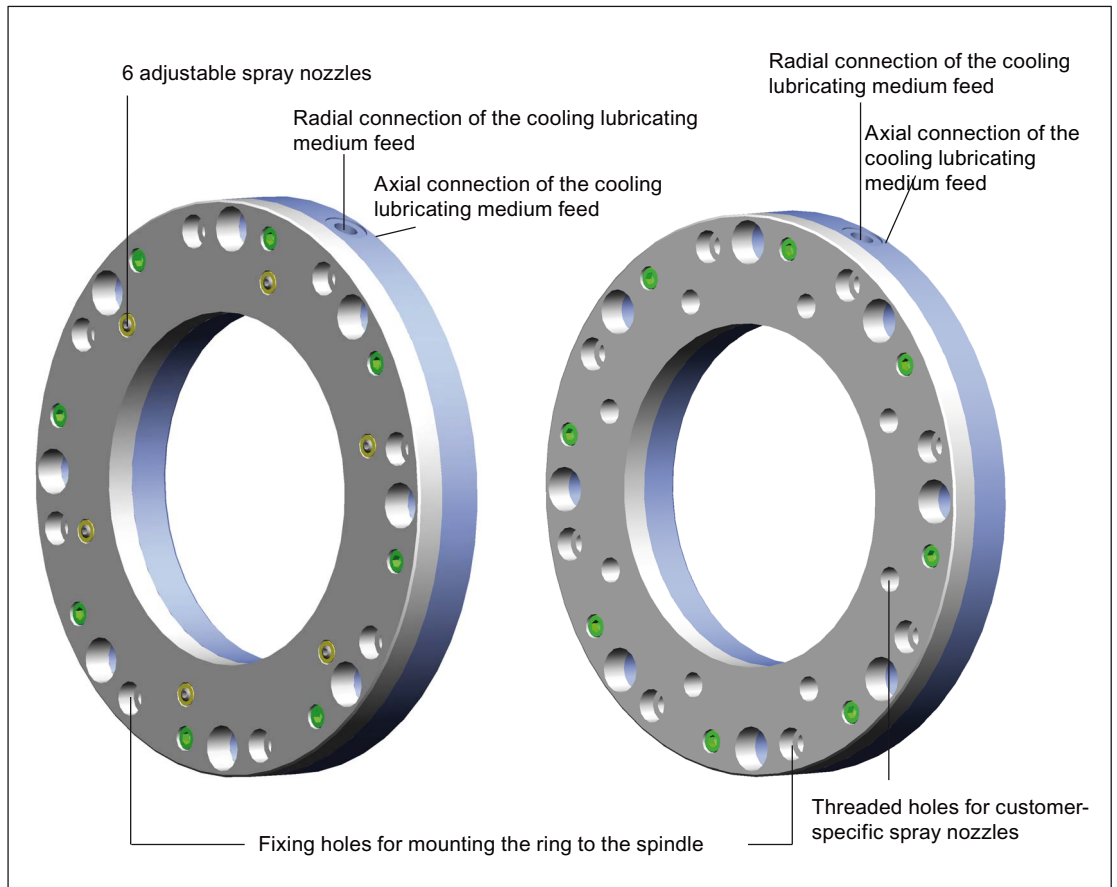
Left-hand side: Ring with the adjustable spray nozzles for the external tool cooling; Righthand side: Ring with threaded holes to screw-in spray nozzles or link chains for external tool cooling
